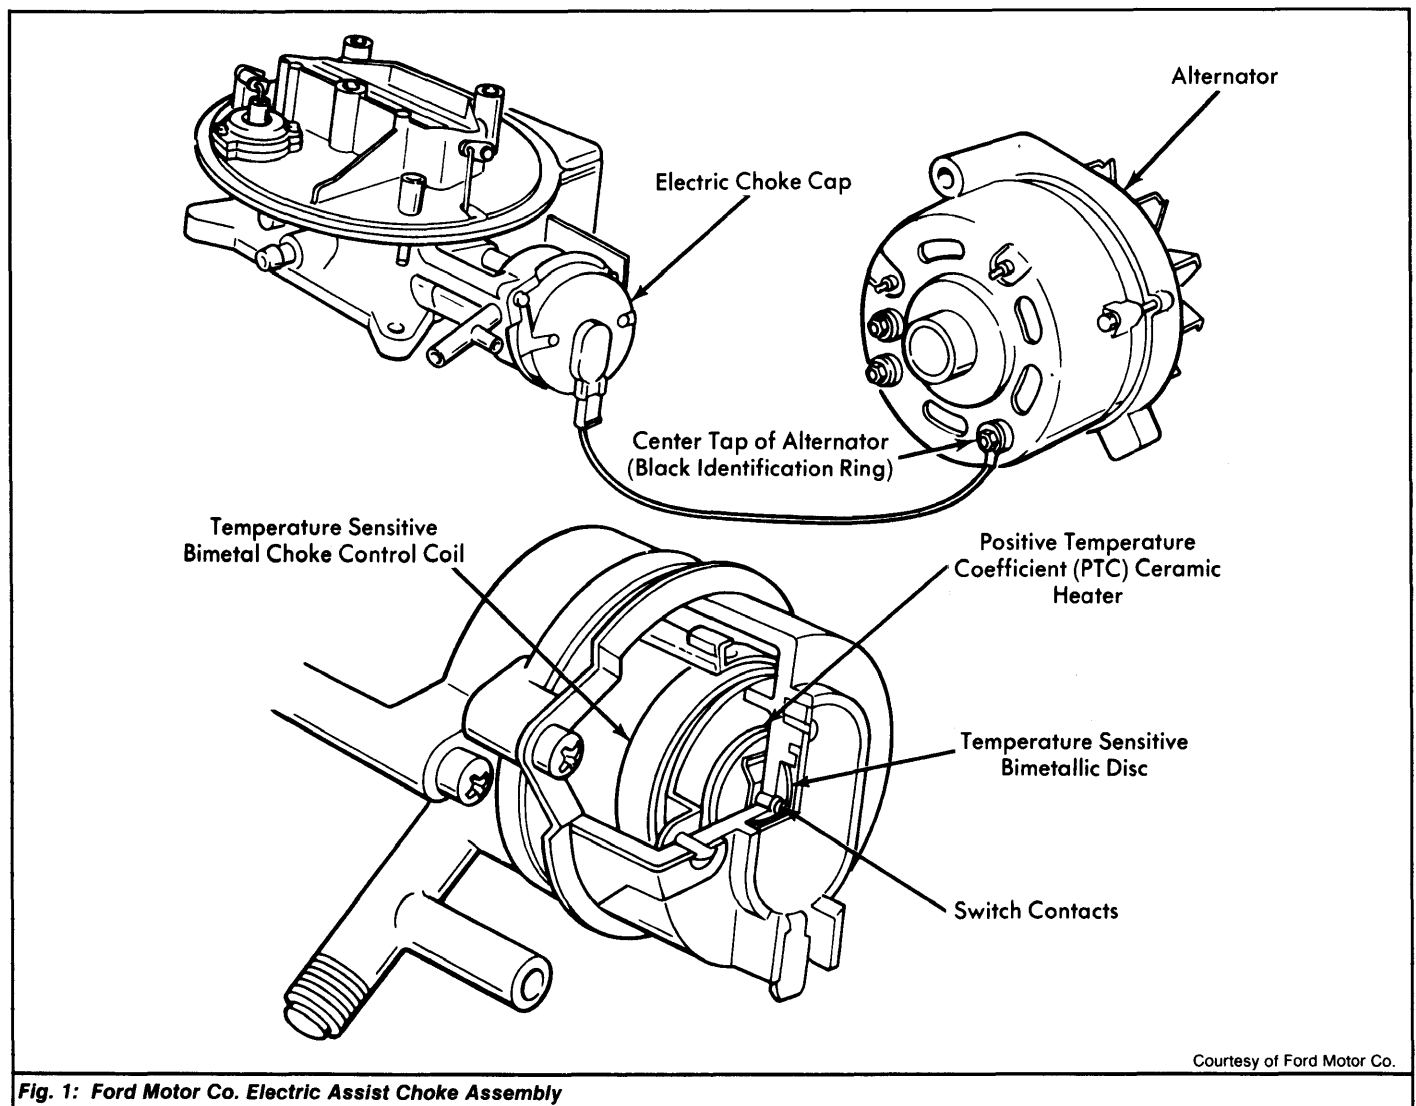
Ford Motor Co. Electric Assist Choke Assembly
